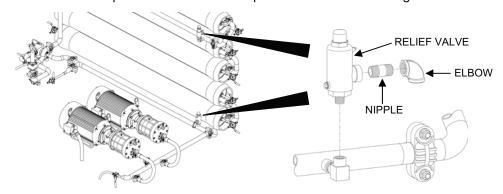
HP Pump Relief Valve RV-301 and RO Feed Relief Valve RV-302 Replacement.
